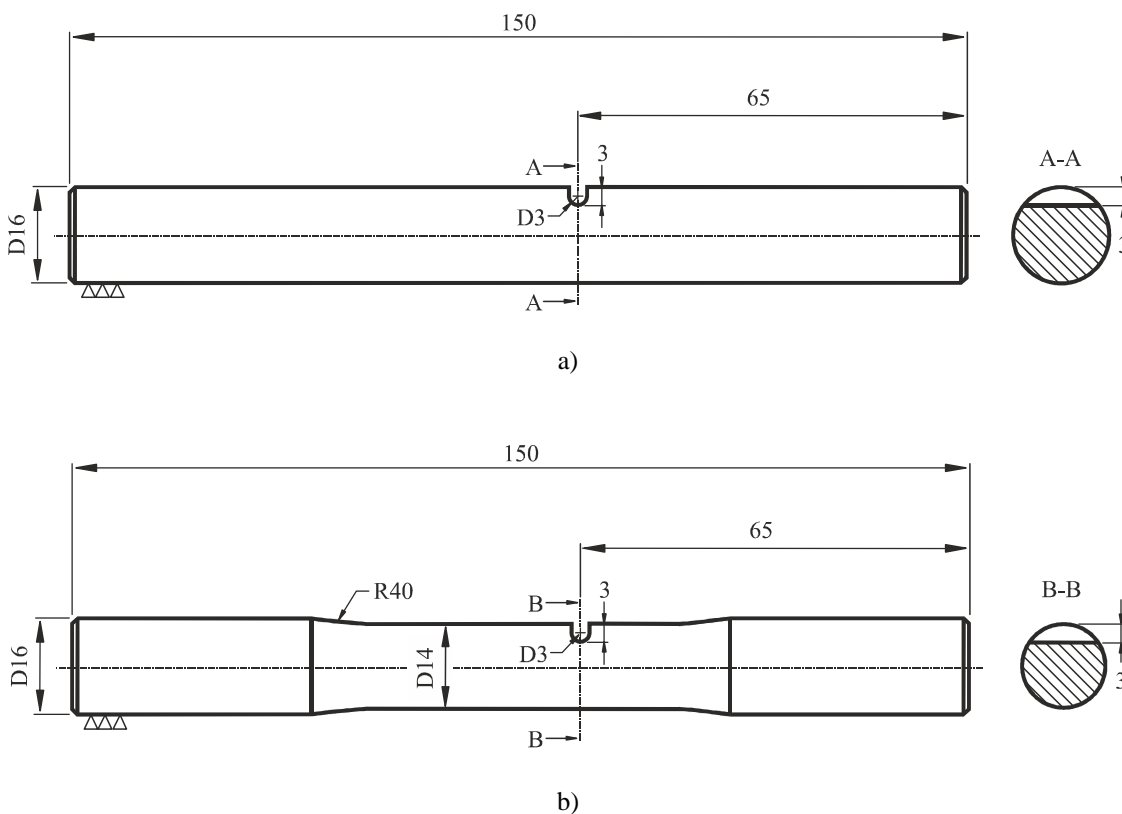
Specimens used in multiaxial fatigue tests: a) single bending and in-phase combined bending-torsion; b) single torsion.
